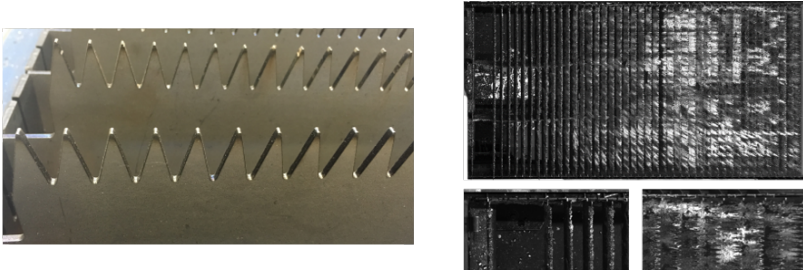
Left: Supporting slats of a LFM. Right: An example image of the empty pallet, with detailed sections of the left and right upper corners below.
